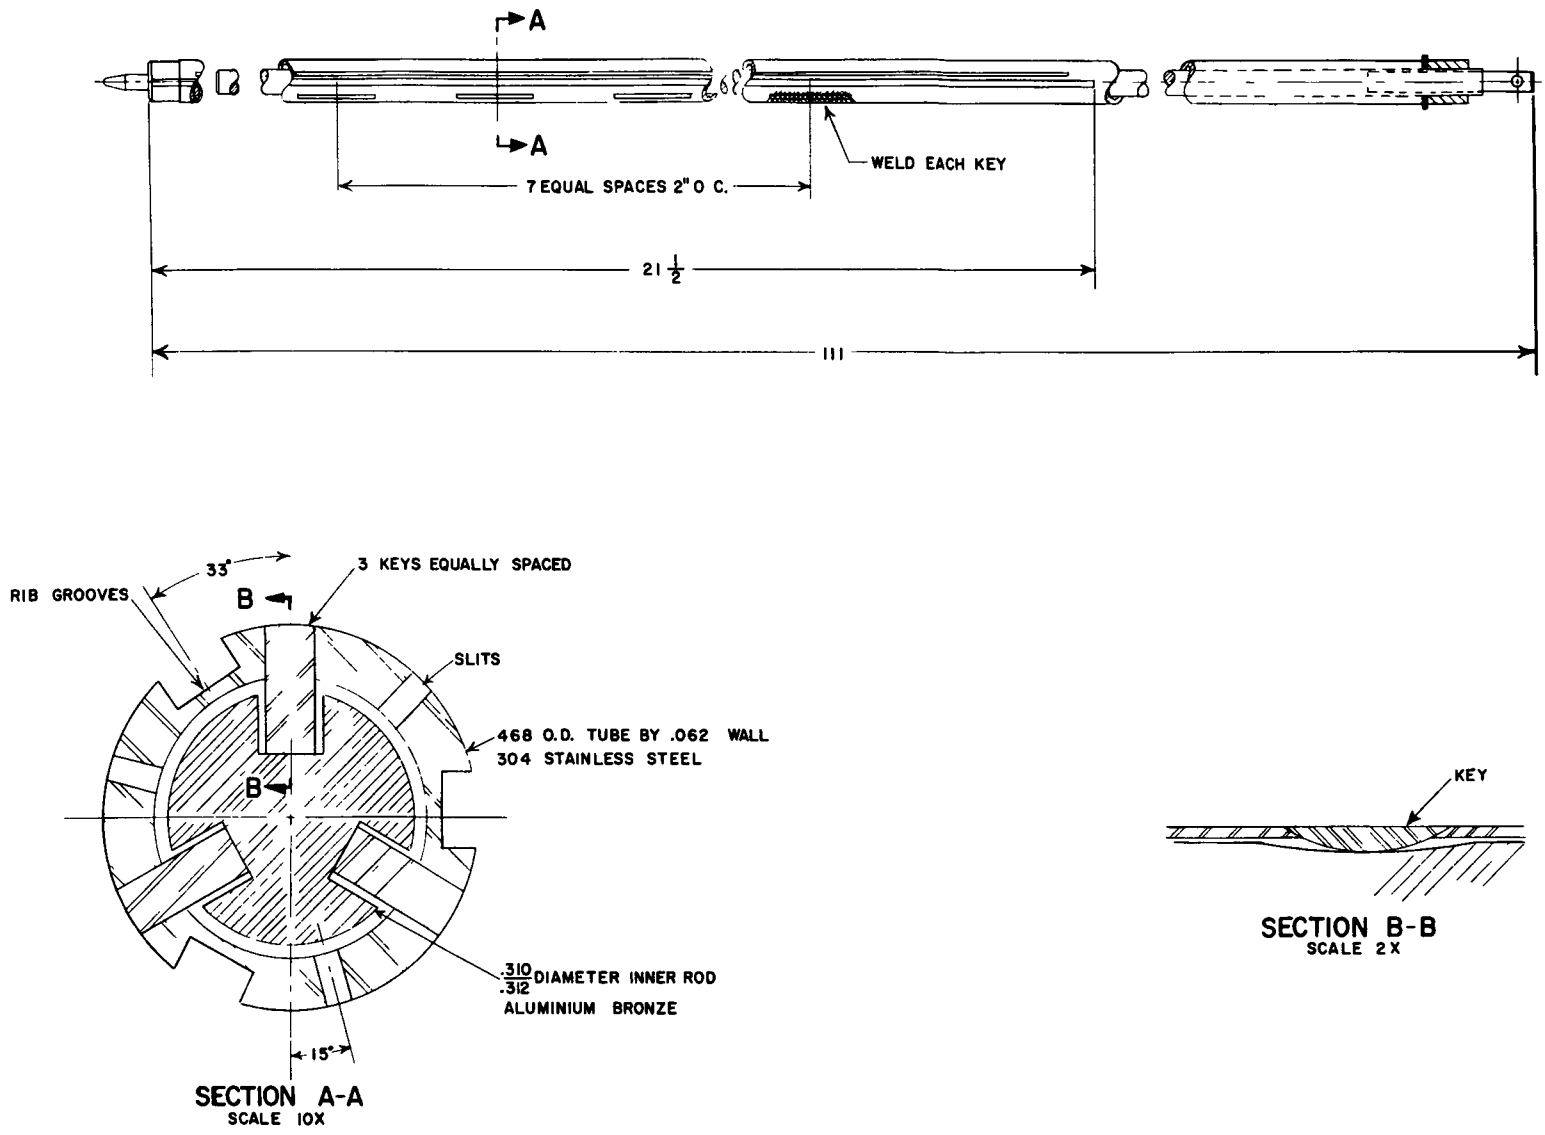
Fuel-tightening Rod, EBR-I, Mark III
